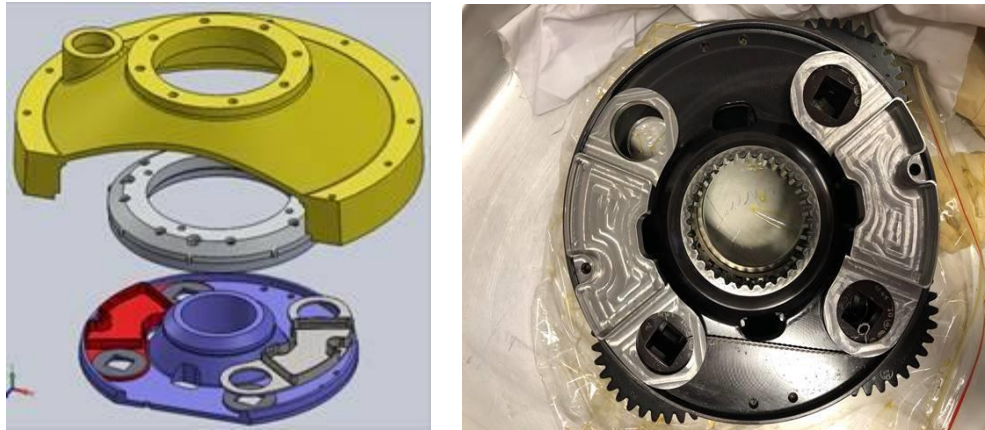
Left – Transmission top gear cover (yellow, top), magnet holder ring (centre) and planet gear carrier with sensor locations (bottom). Right: Actual placement of sensor enclosure on planet gear carrier.
